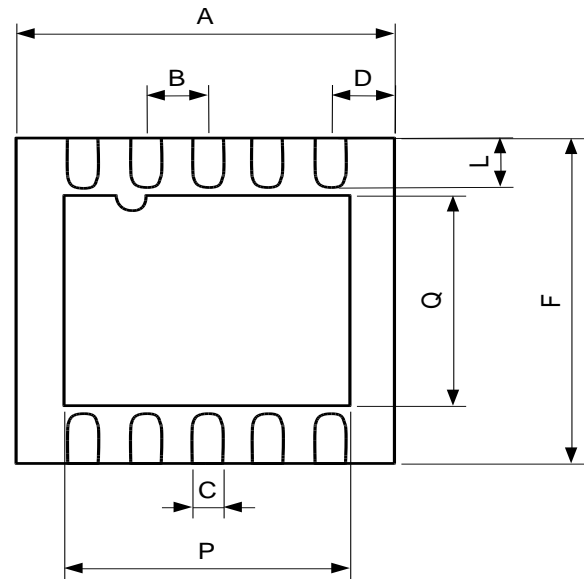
DFN-10 Package dimensions (bottom view). Note that the saddle needs to be connected to common GND on the PCB.
